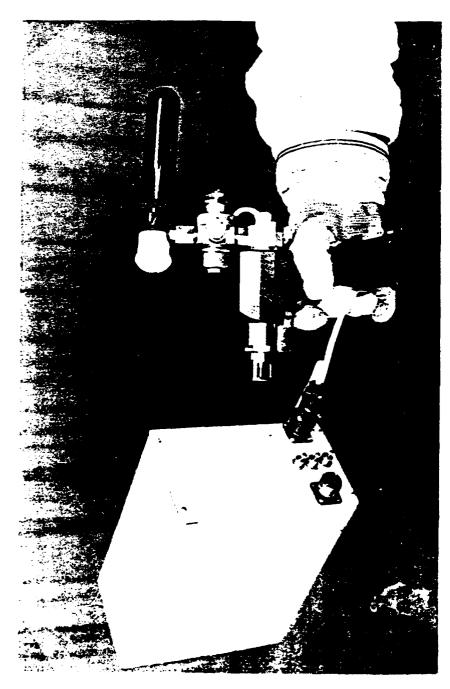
Prototype of torch and power supply for manual hollow cathode welding in space [66]
